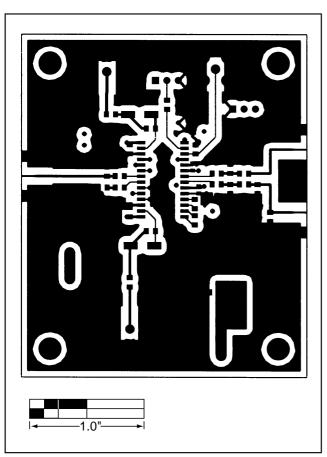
MAX2102 EV Kit PC Board Layout—Component Side
